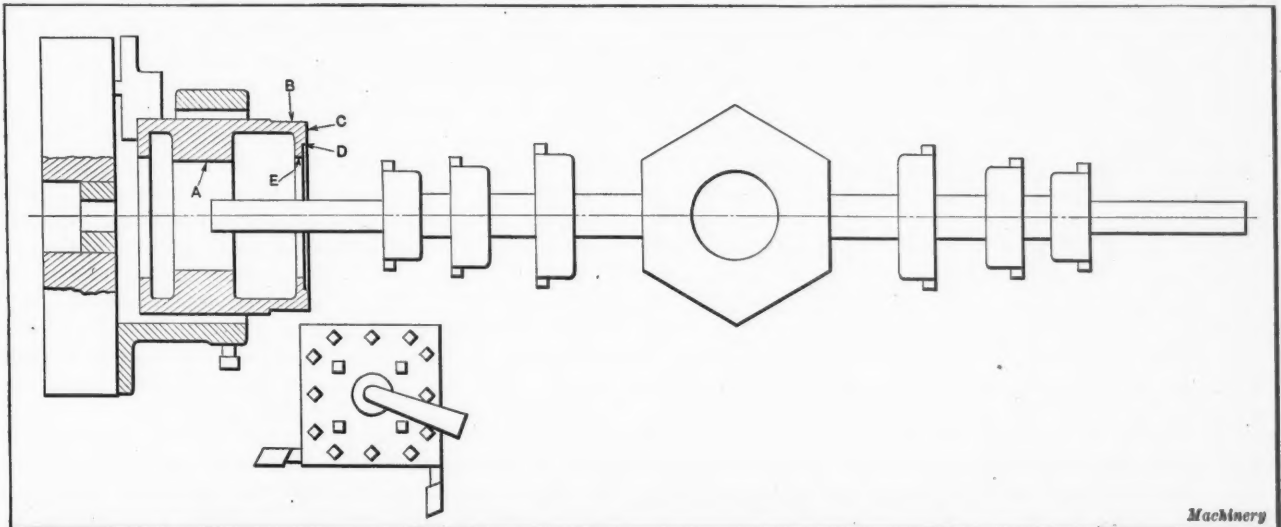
Tooling Equipment for First Operation on Heavy Casting shown in Fig. 29
